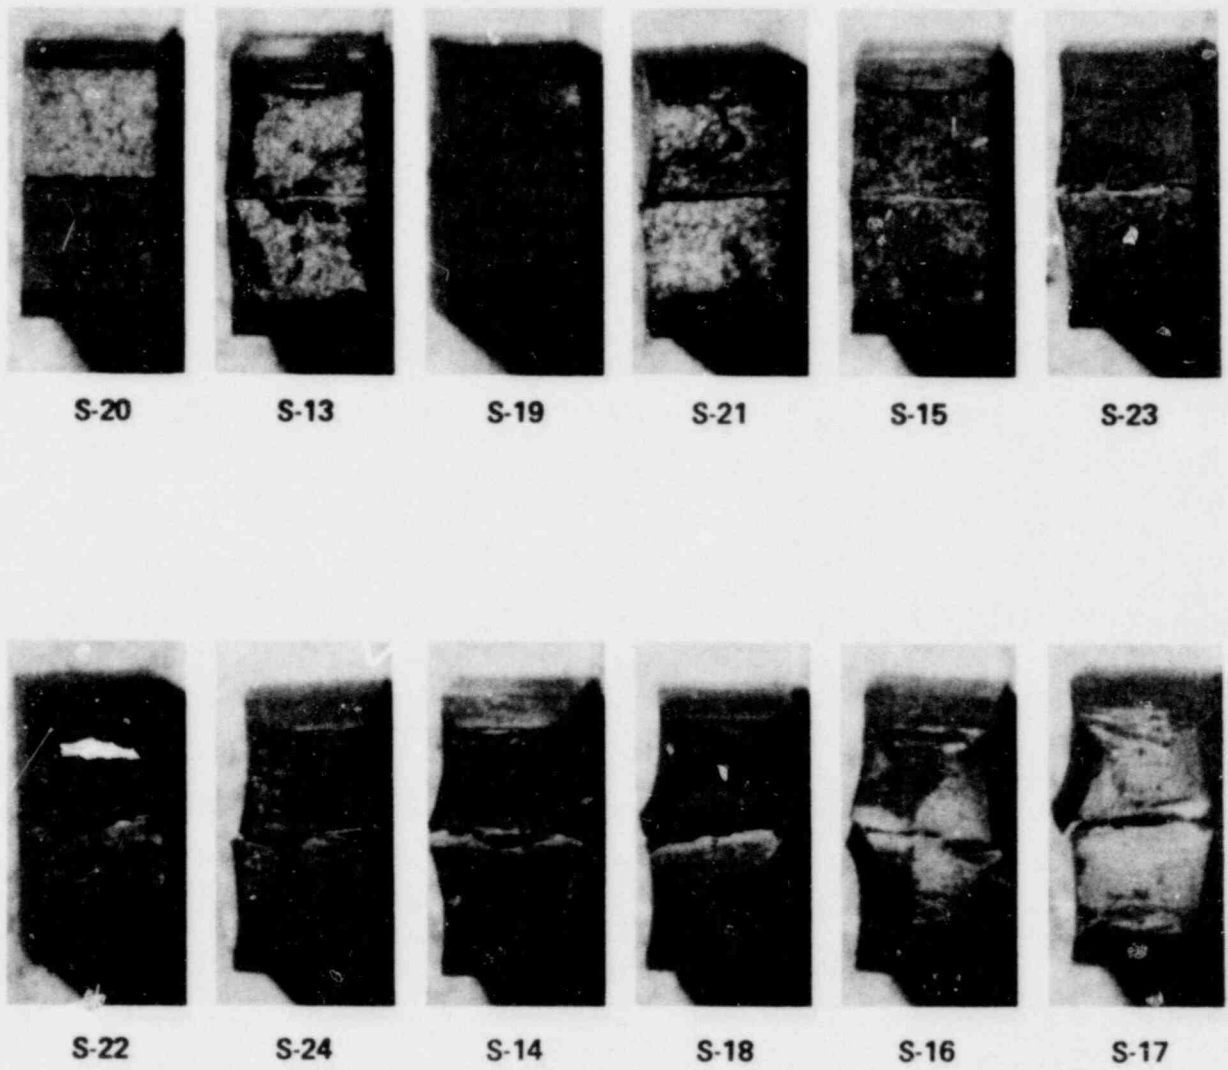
Charpy Impact Specimen Fracture Surfaces for Kewaunee Lower Shell Forging 123x167 VA1
